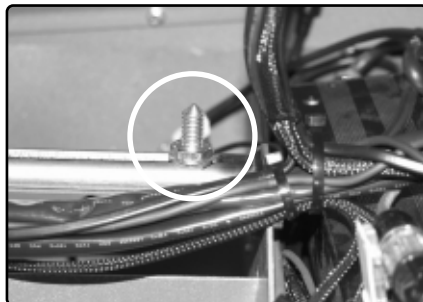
A tapered screw is fitted to mark the position of the hole on the cover
